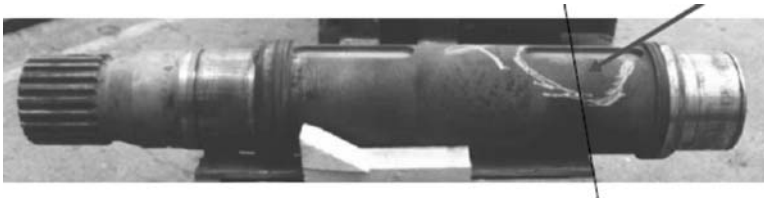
Coal-conveyor drive shaft that cracked in service. (Reprinted with the permission of M. Zamanzadeh, ATCO Associates, Pittsburgh, USA)
